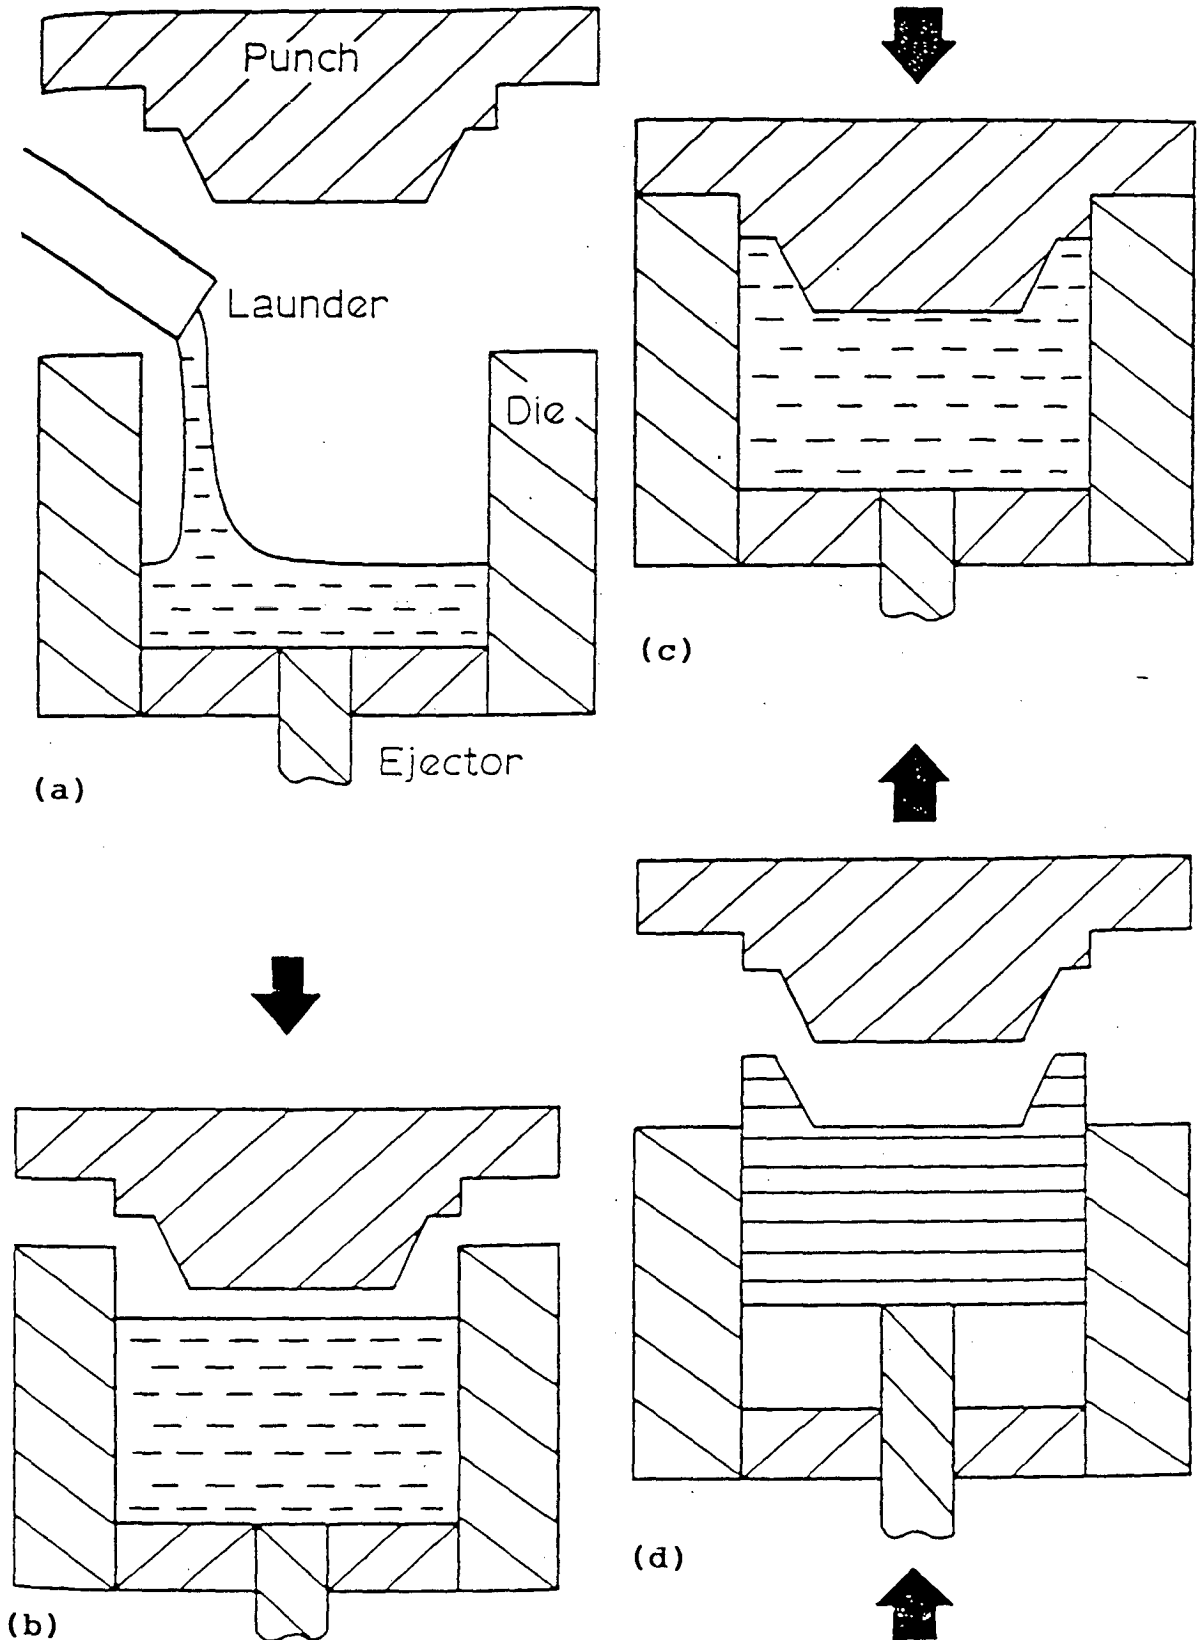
Steps in producing a squeeze casting, (a) molten metal poured into die, (b) punch activated, (c) pressure applied to molten metal, and, (d) casting ejected. (Ref.89)
